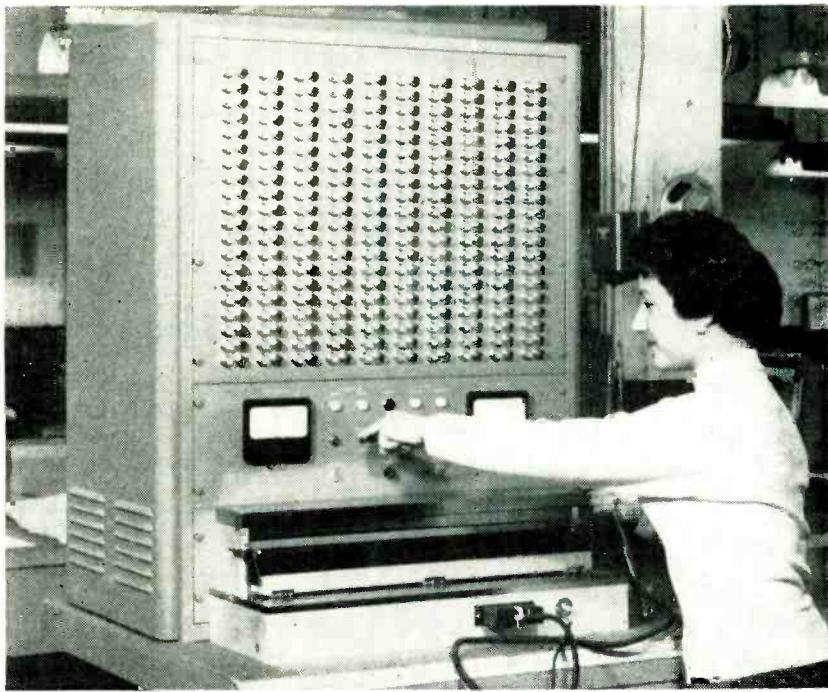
Complete ferrite core matrix is plugged into unit for test. Entire assembly is checked in one minute
